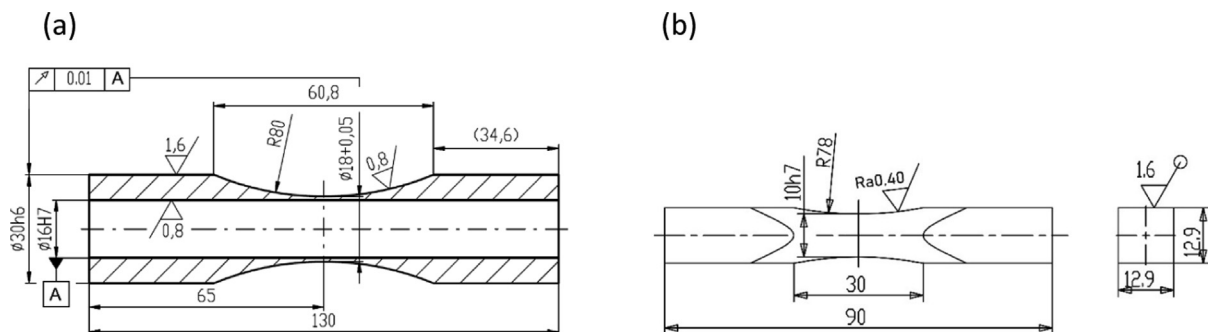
Specimen geometries for: (a) push-pull loading (for the Amsler machine, the gripped ends had an M32x1 thread) and torsion loading, (b) plane bending and torsion.
